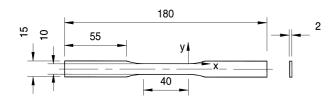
Dog-bone specimen dimensions for  $(0/90/0/90/0/90)_s$  tensile test.
